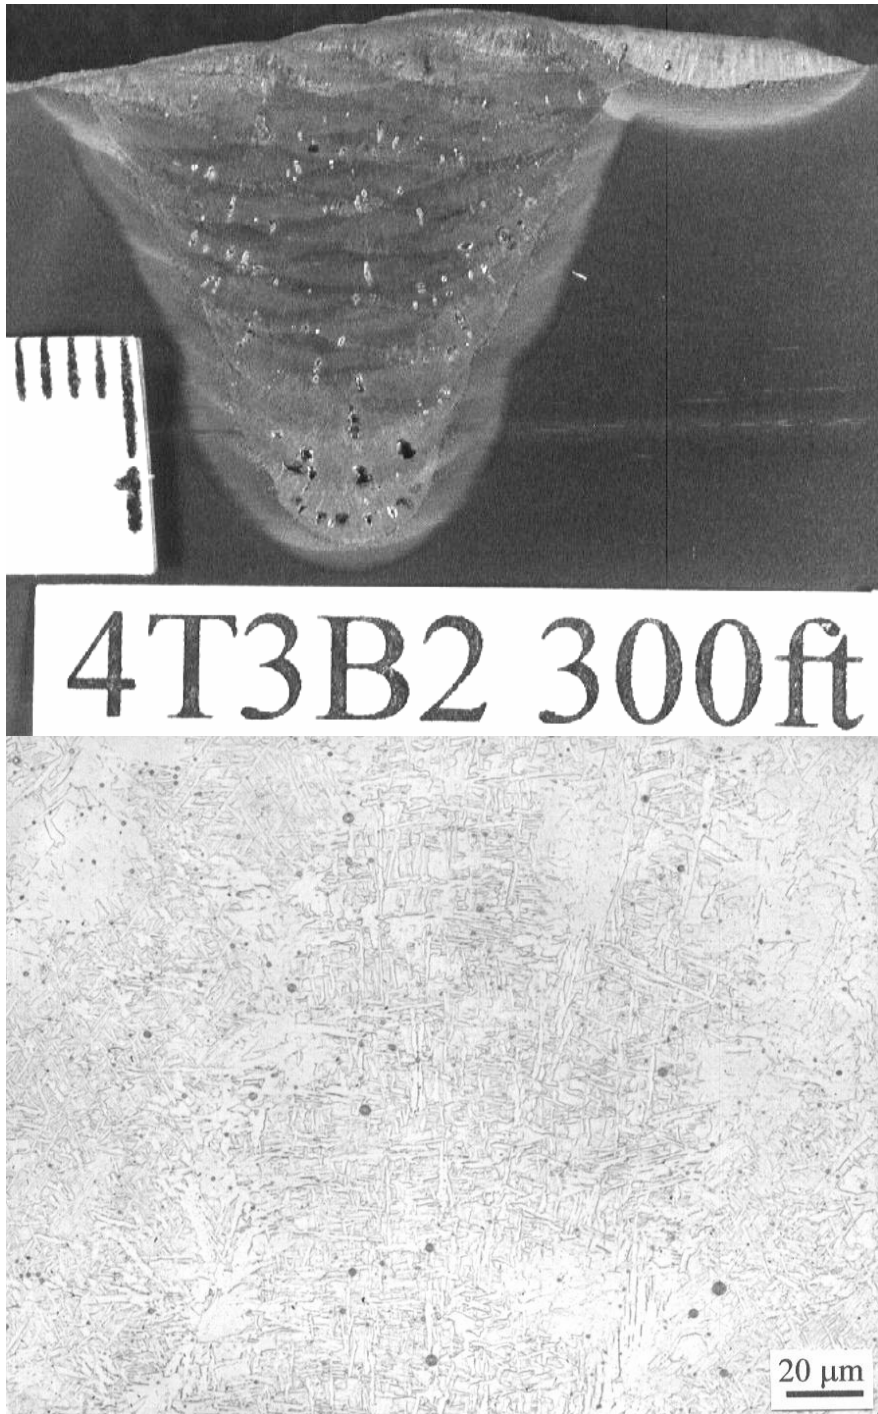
Macro-section and top bead microstructure from 4T3B2 V-groove weld.
